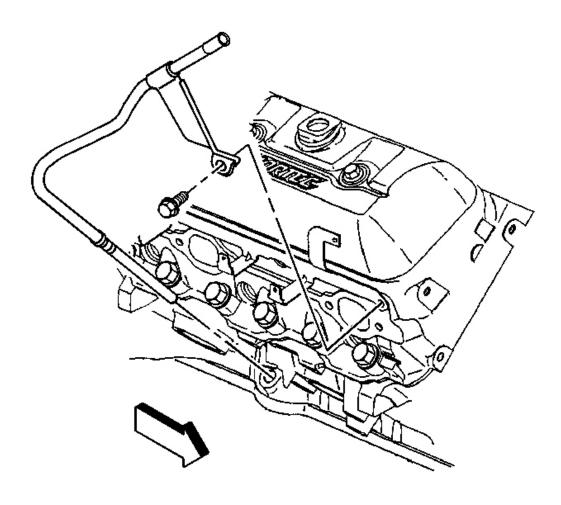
Locating Oil Level Indicator Tube Bolt Courtesy of GENERAL MOTORS CORP.
